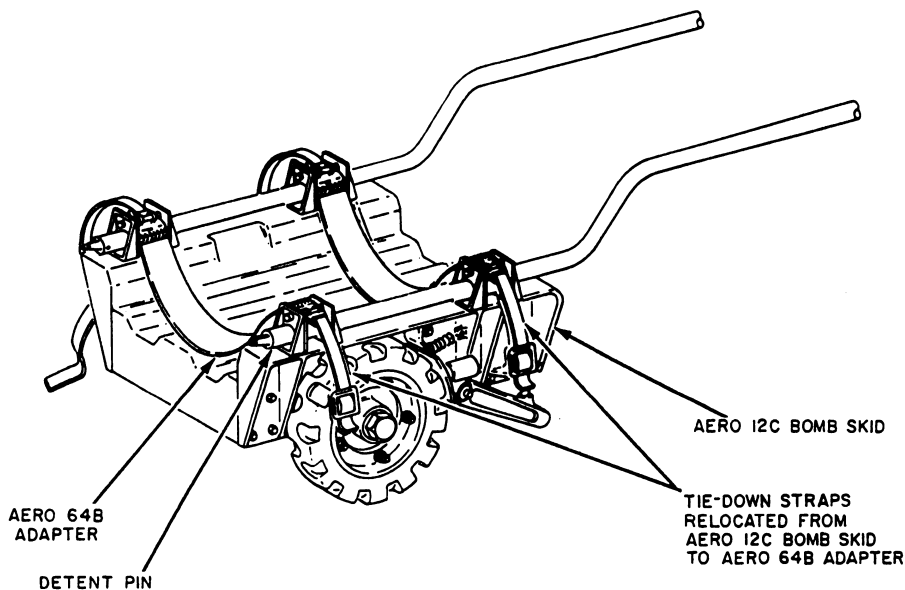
Aero 64B soft-belt adapter mounted on an Aero 12C bomb skid.
